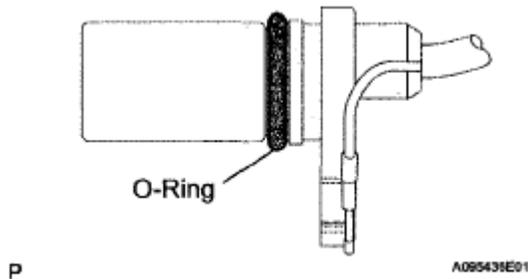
Applying Light Coat Of Engine Oil To O-Ring Of Sensor
